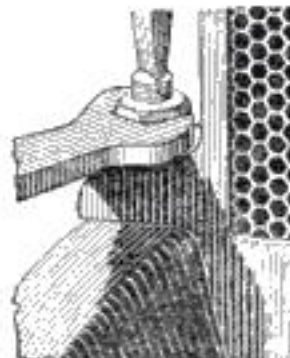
A slot sawed in end of bolt for screwdriver for tightening radiator bolt
